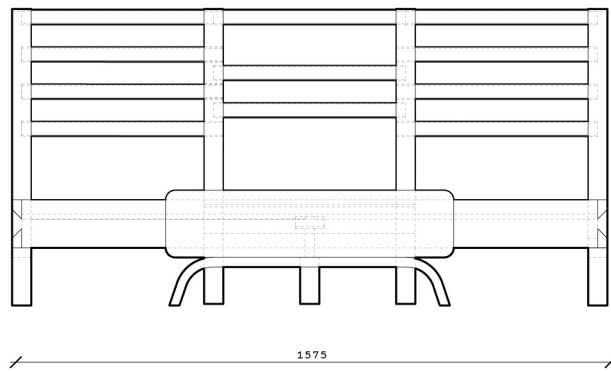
Bed Front elevation - Queen Size, Drawing by Author
